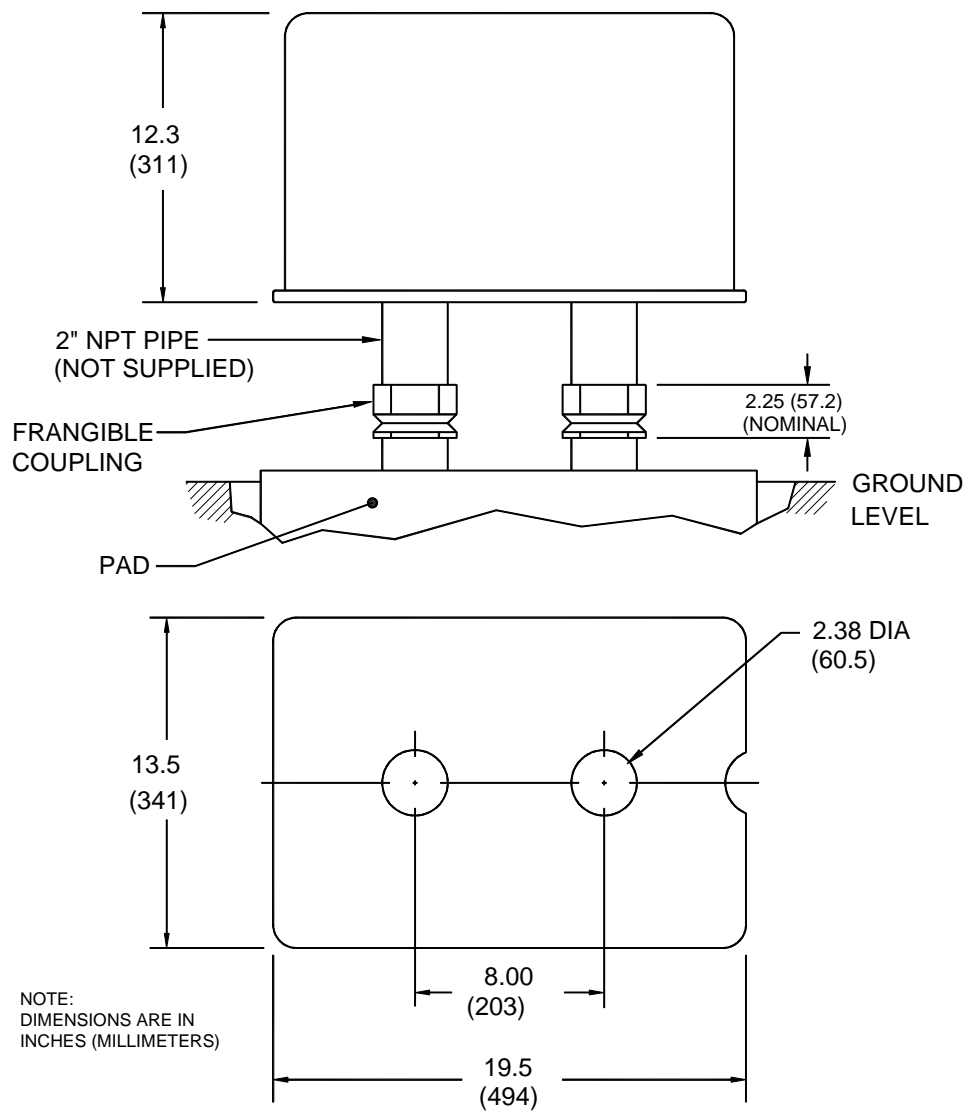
PC 400 or PC 800 Power Converter Mounting and Outline
